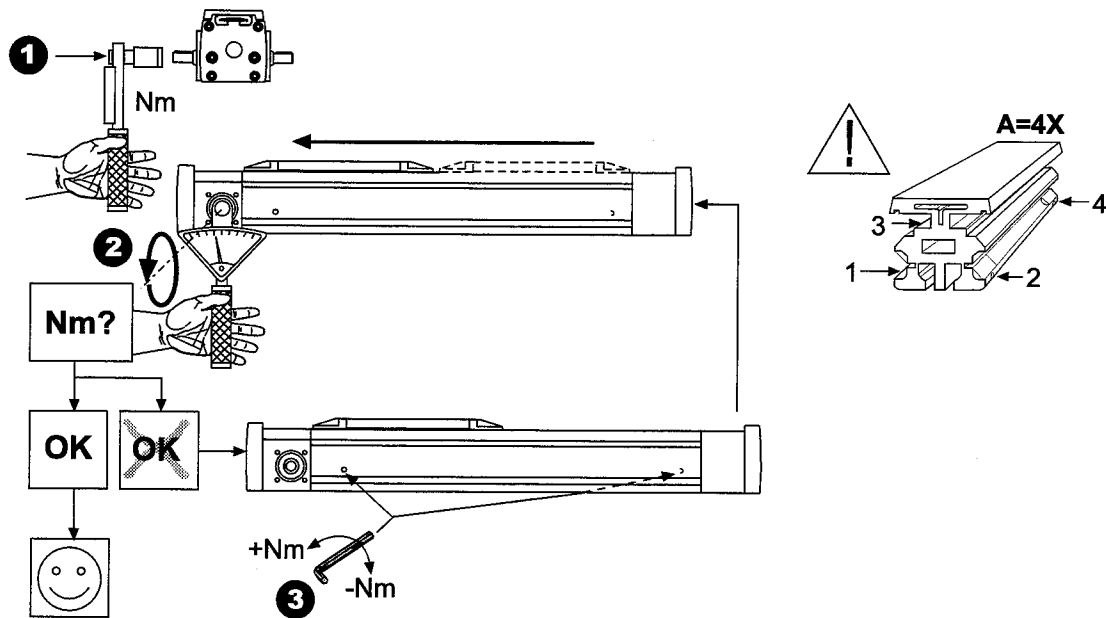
Adjustment of prism bushings in belt driven units with single saddles.
